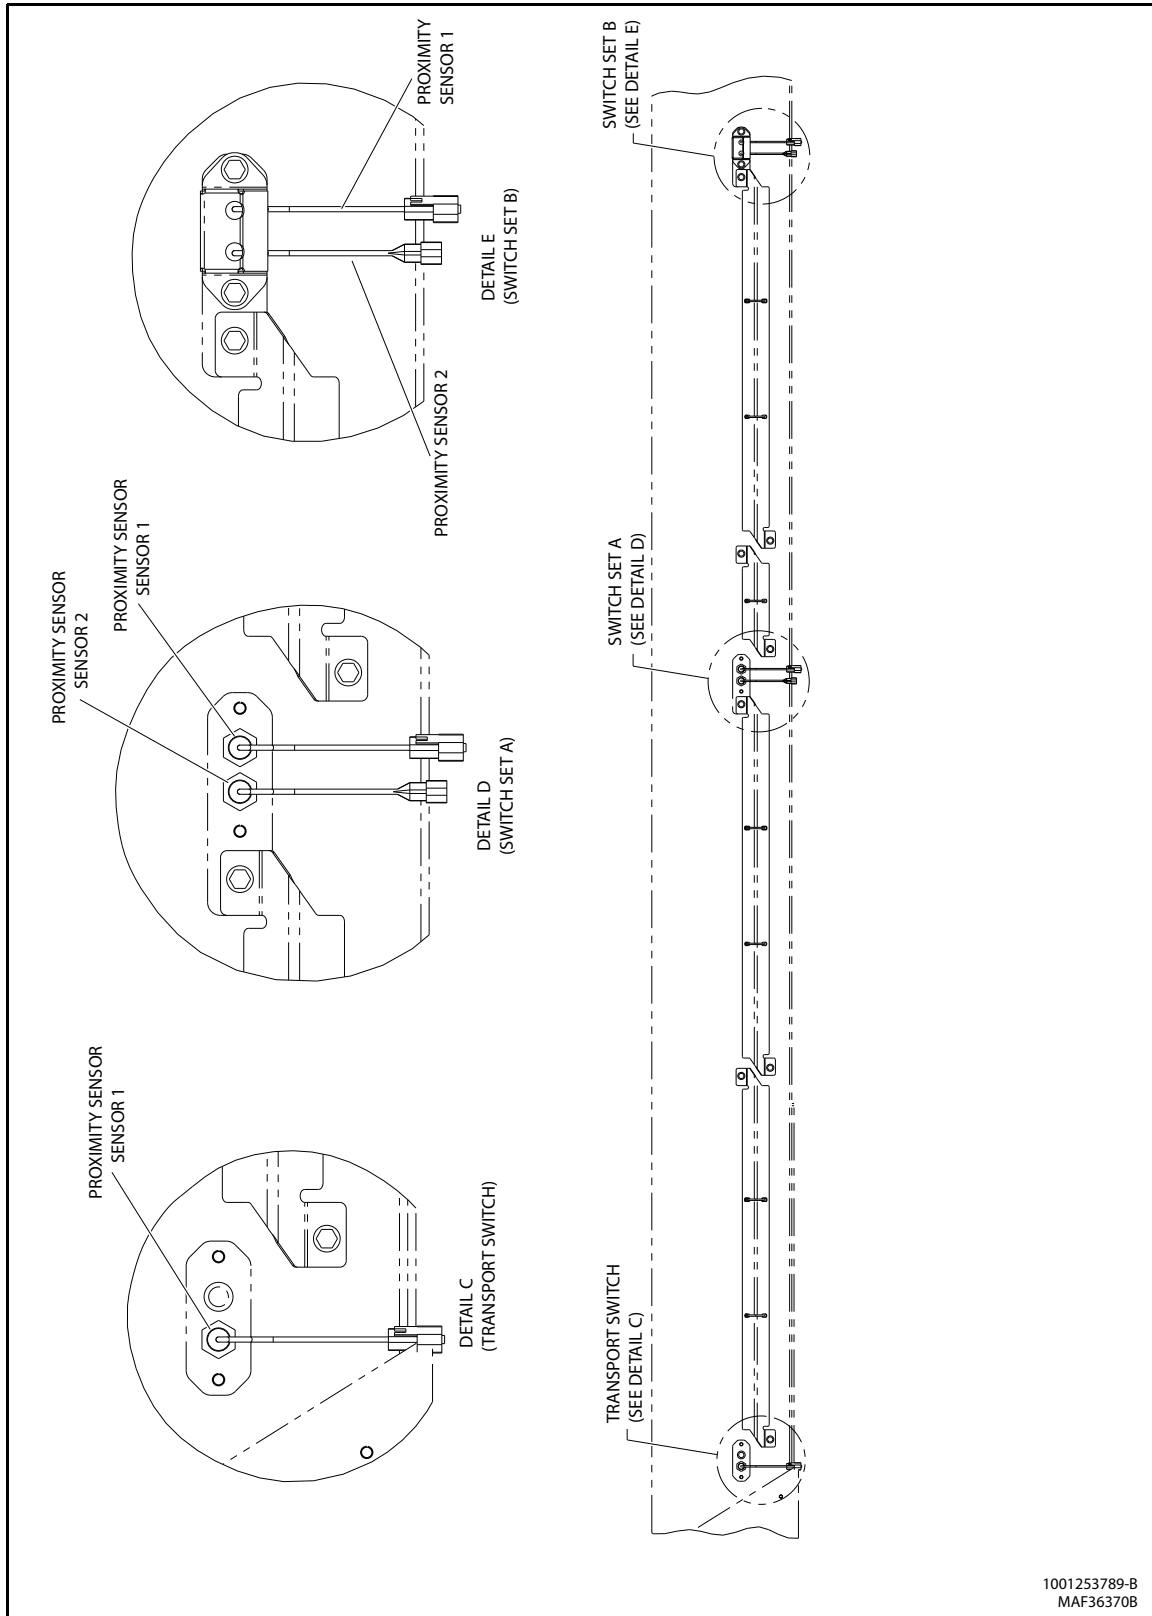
Capacity Switch Installation - Sheet 2 of 3
